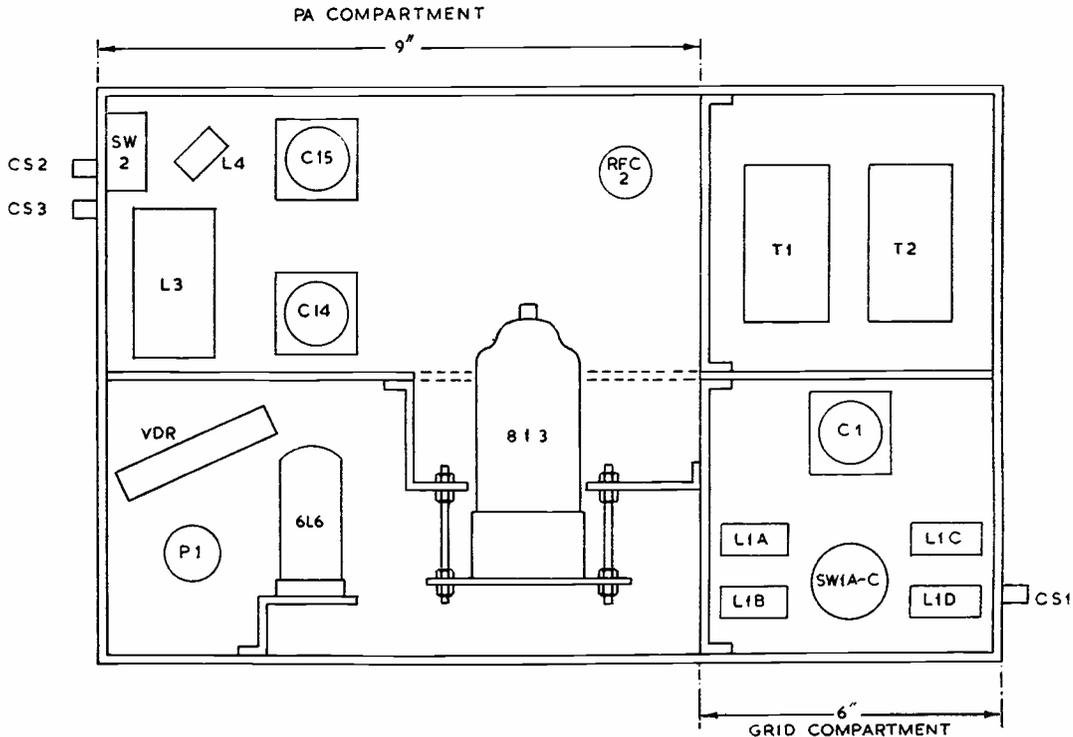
Layout internally of the 813 PA unit, suggesting how the space available in a TU cabinet can be utilised. The grid assembly is lower right, and T1, T2 are the LT supply transformers — see Fig. 1. The resistor marked VDR is a heat dissipating element and must be mounted in such a way that it can run as cool as possible. P1 is the power control potentiometer.
